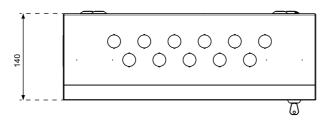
FC602S/FC604S Scandinavian panel - overall dimensions in mm
